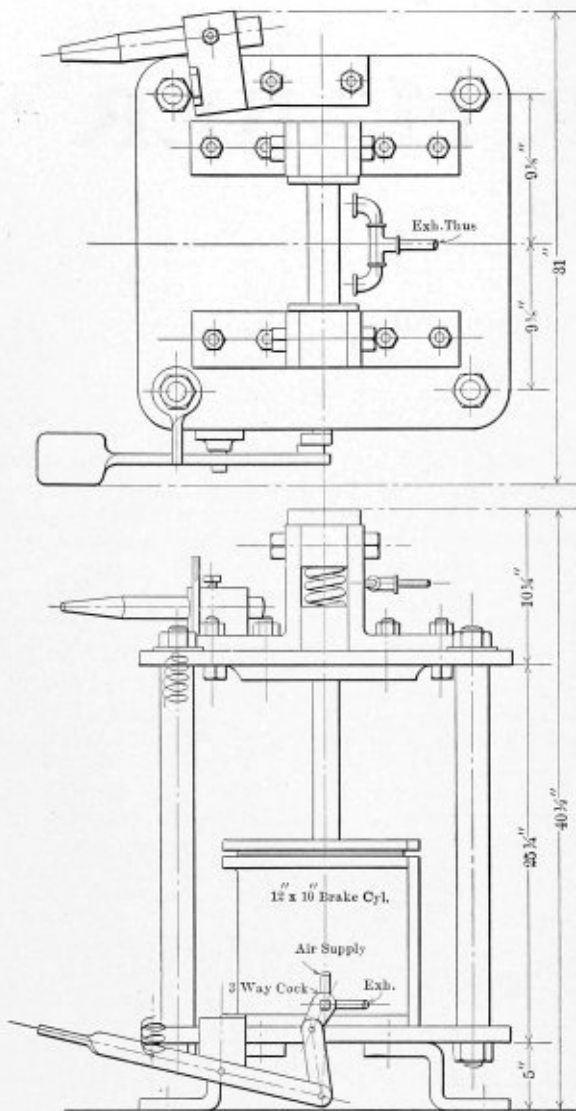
GENERAL DESIGN OF SWEDGING MACHINE.
